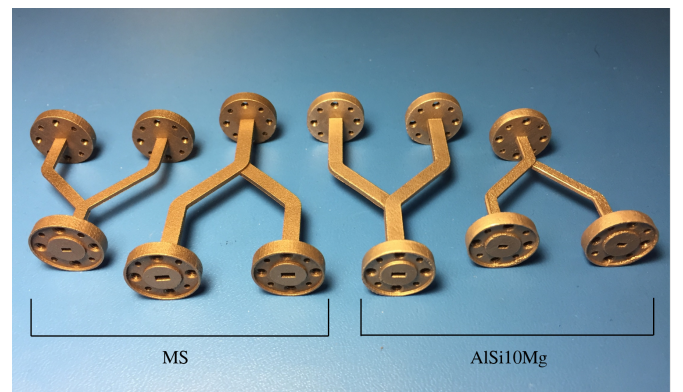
Photograph of WR-10 and WR-15 waveguide 3-dB splitters implemented in maraging steel (MS) and aluminum alloy (AlSi₁₀Mg). The AlSi₁₀Mg components were not functional due to poor printing tolerances that could not meet the dimensions of the internal splitter design geometry.
